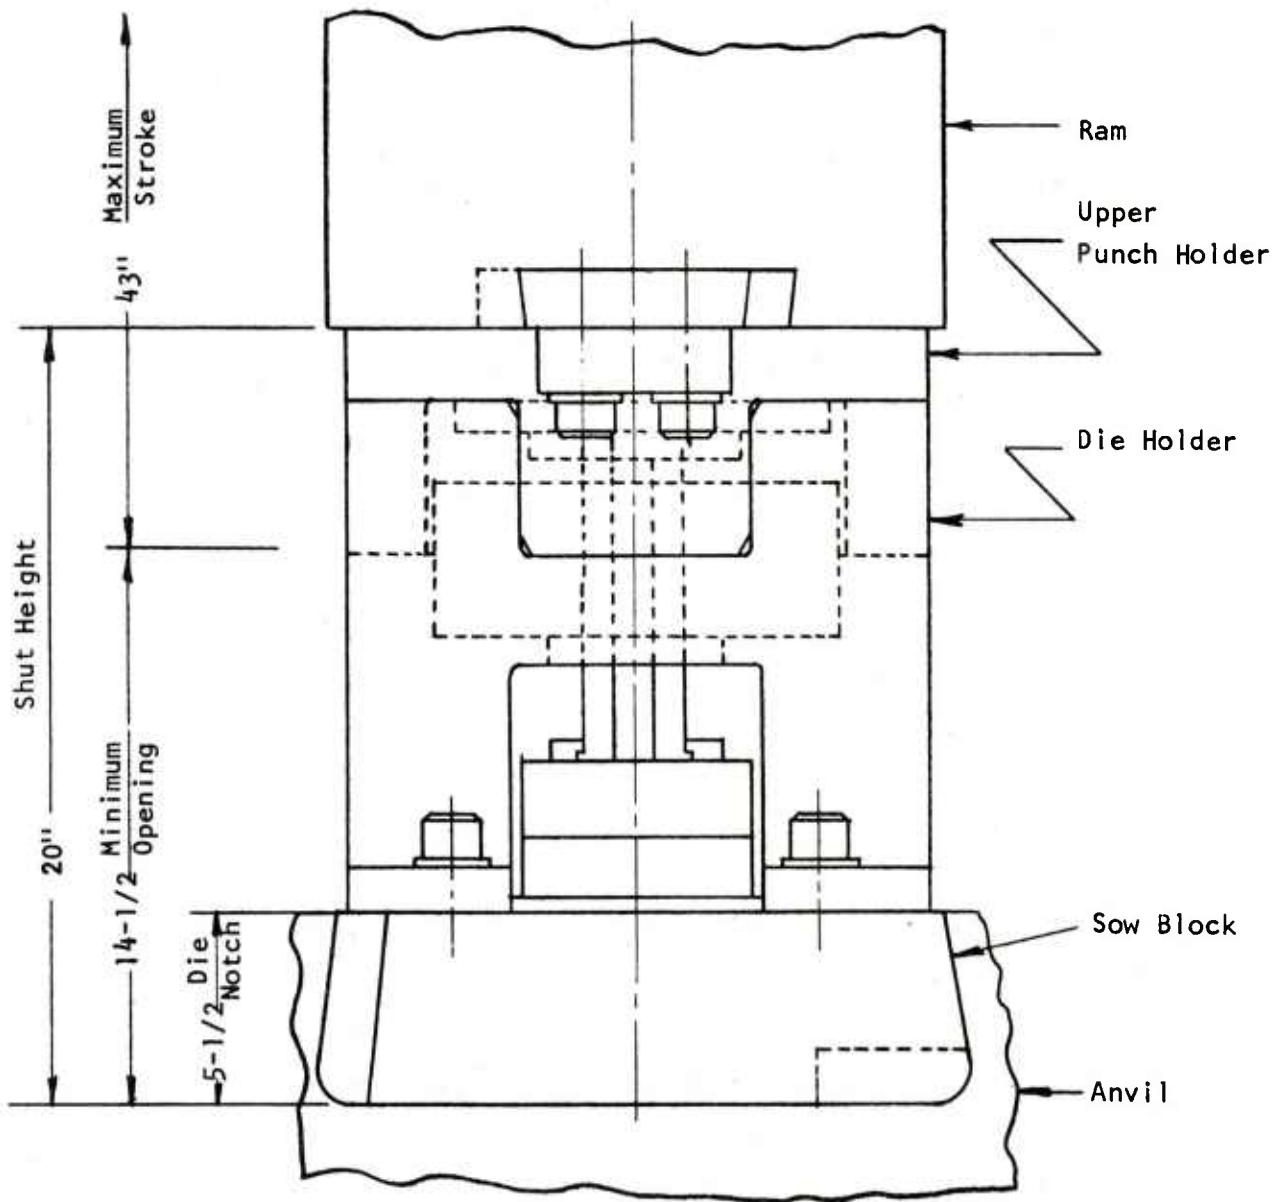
Front View of Die Setup for P/M Forging Accelerators In 1000 Lb. Chambersburg Steam Drop Hammer. Shown With Ejection Cylinders Removed.
